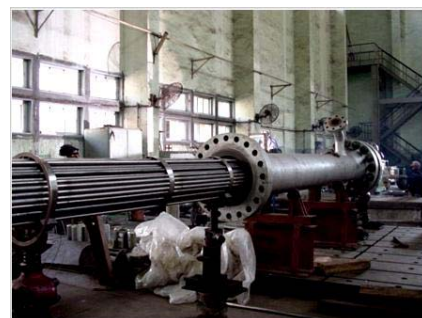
Assembly, one by one of the shells, on the 11.5 meter long Tube-Bundle
